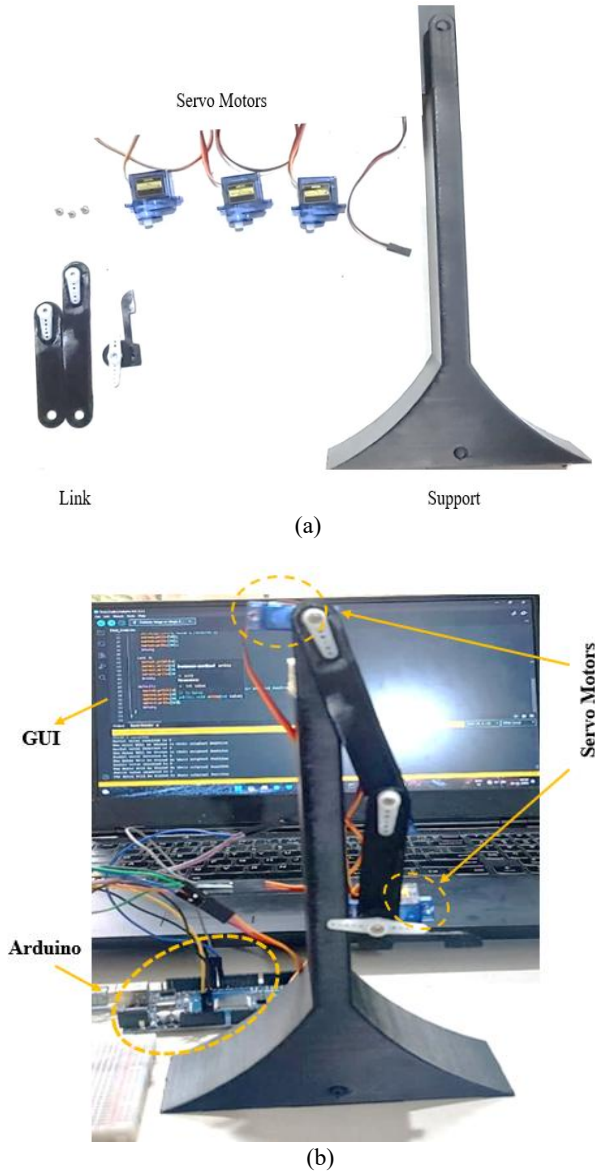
Model details: (a) Parts of the model and (b) Complete assembly of the model
